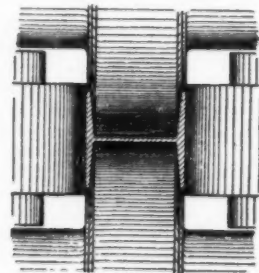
SINGLE REVERSING UNIVERSAL MILL
